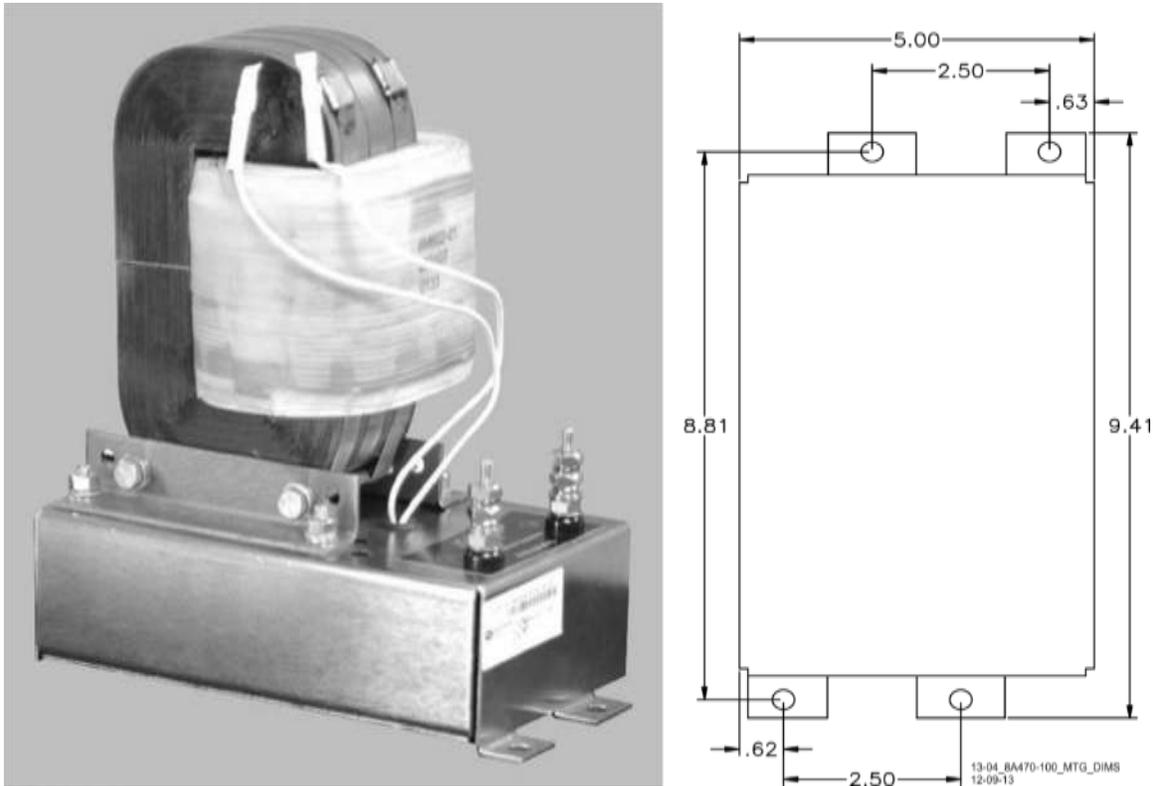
AC Code Unit, 8A470-100, with Mounting Dimensions
